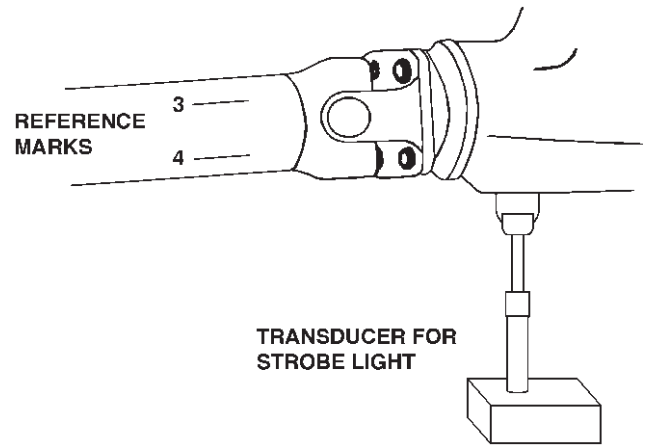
Driveshaft balance can be checked by attaching a wheel balancer transducer to the front of the axle housing. The strobe light will freeze shaft rotation so you can read the reference marks and determine the heavy part of the shaft.
